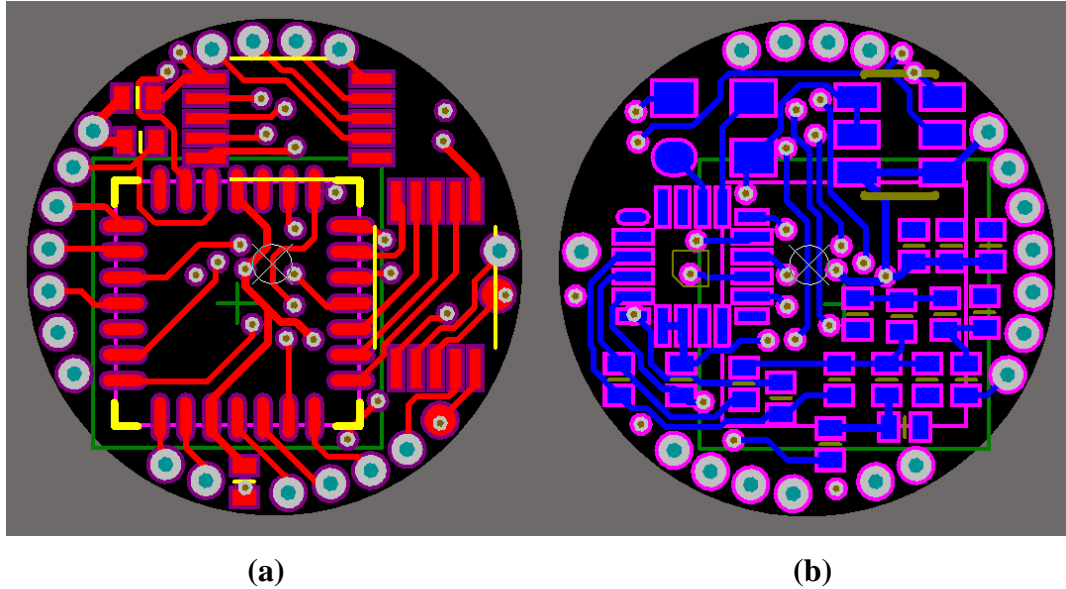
PCB Board Design of the Internal Wireless Communication Module
